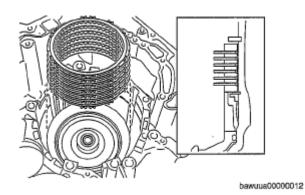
Identifying Retaining Plates, Drive And Driven Plates Courtesy of MAZDA MOTORS CORP.
